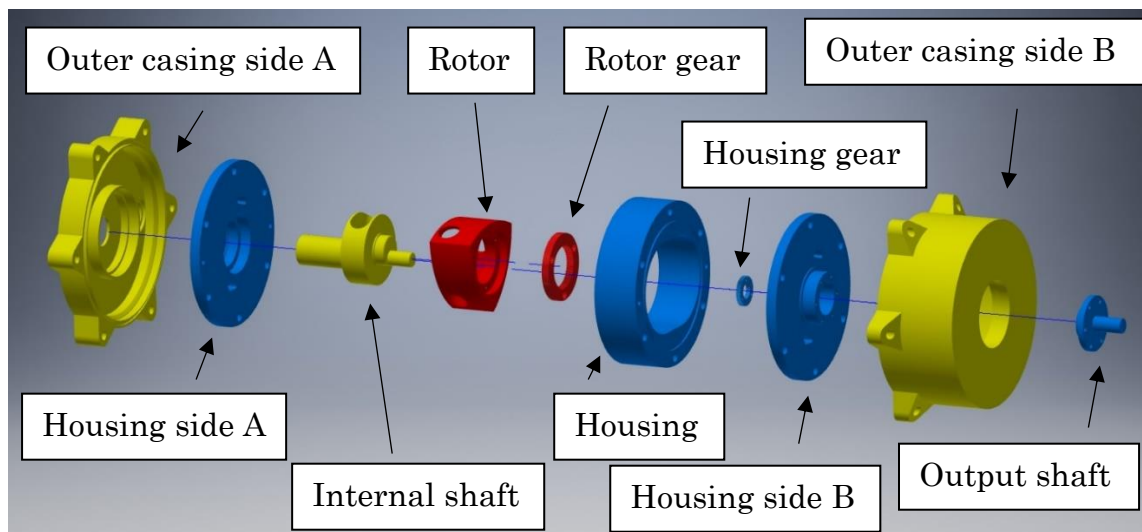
Exploded CAD view of the static shaft Wankel expander's first prototype
